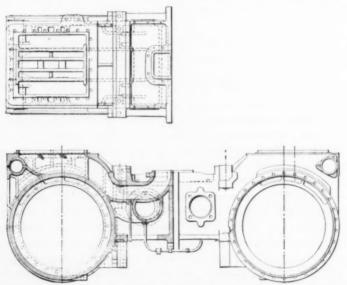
Cross Section, Front and Plan Views of Low Pressure Cylinders
